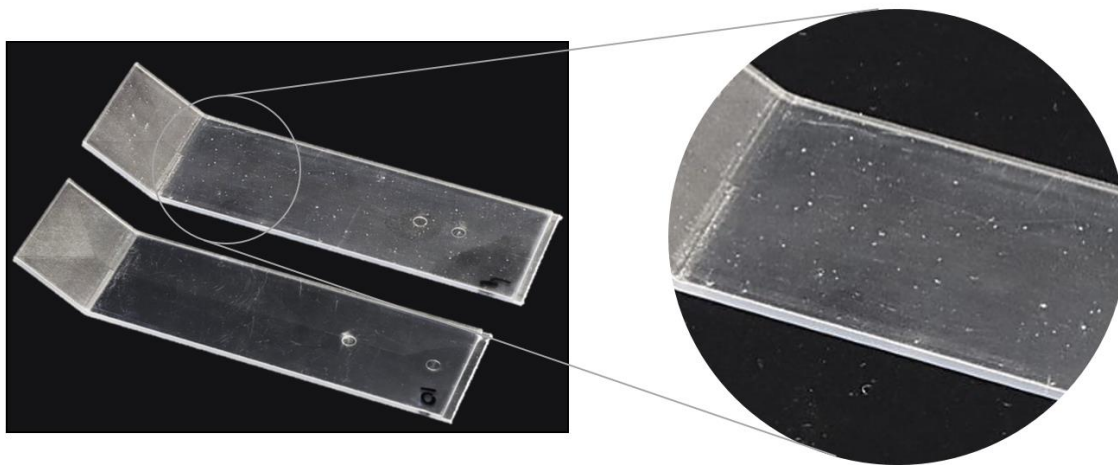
Surface appearance of the GPPS 165H mouldings, produced with the additive (top) and conventional (bottom) moulding inserts.
